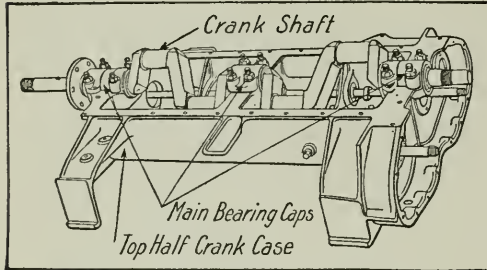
Top half of crankcase, showing method of crankshaft retention by three main bearing caps
